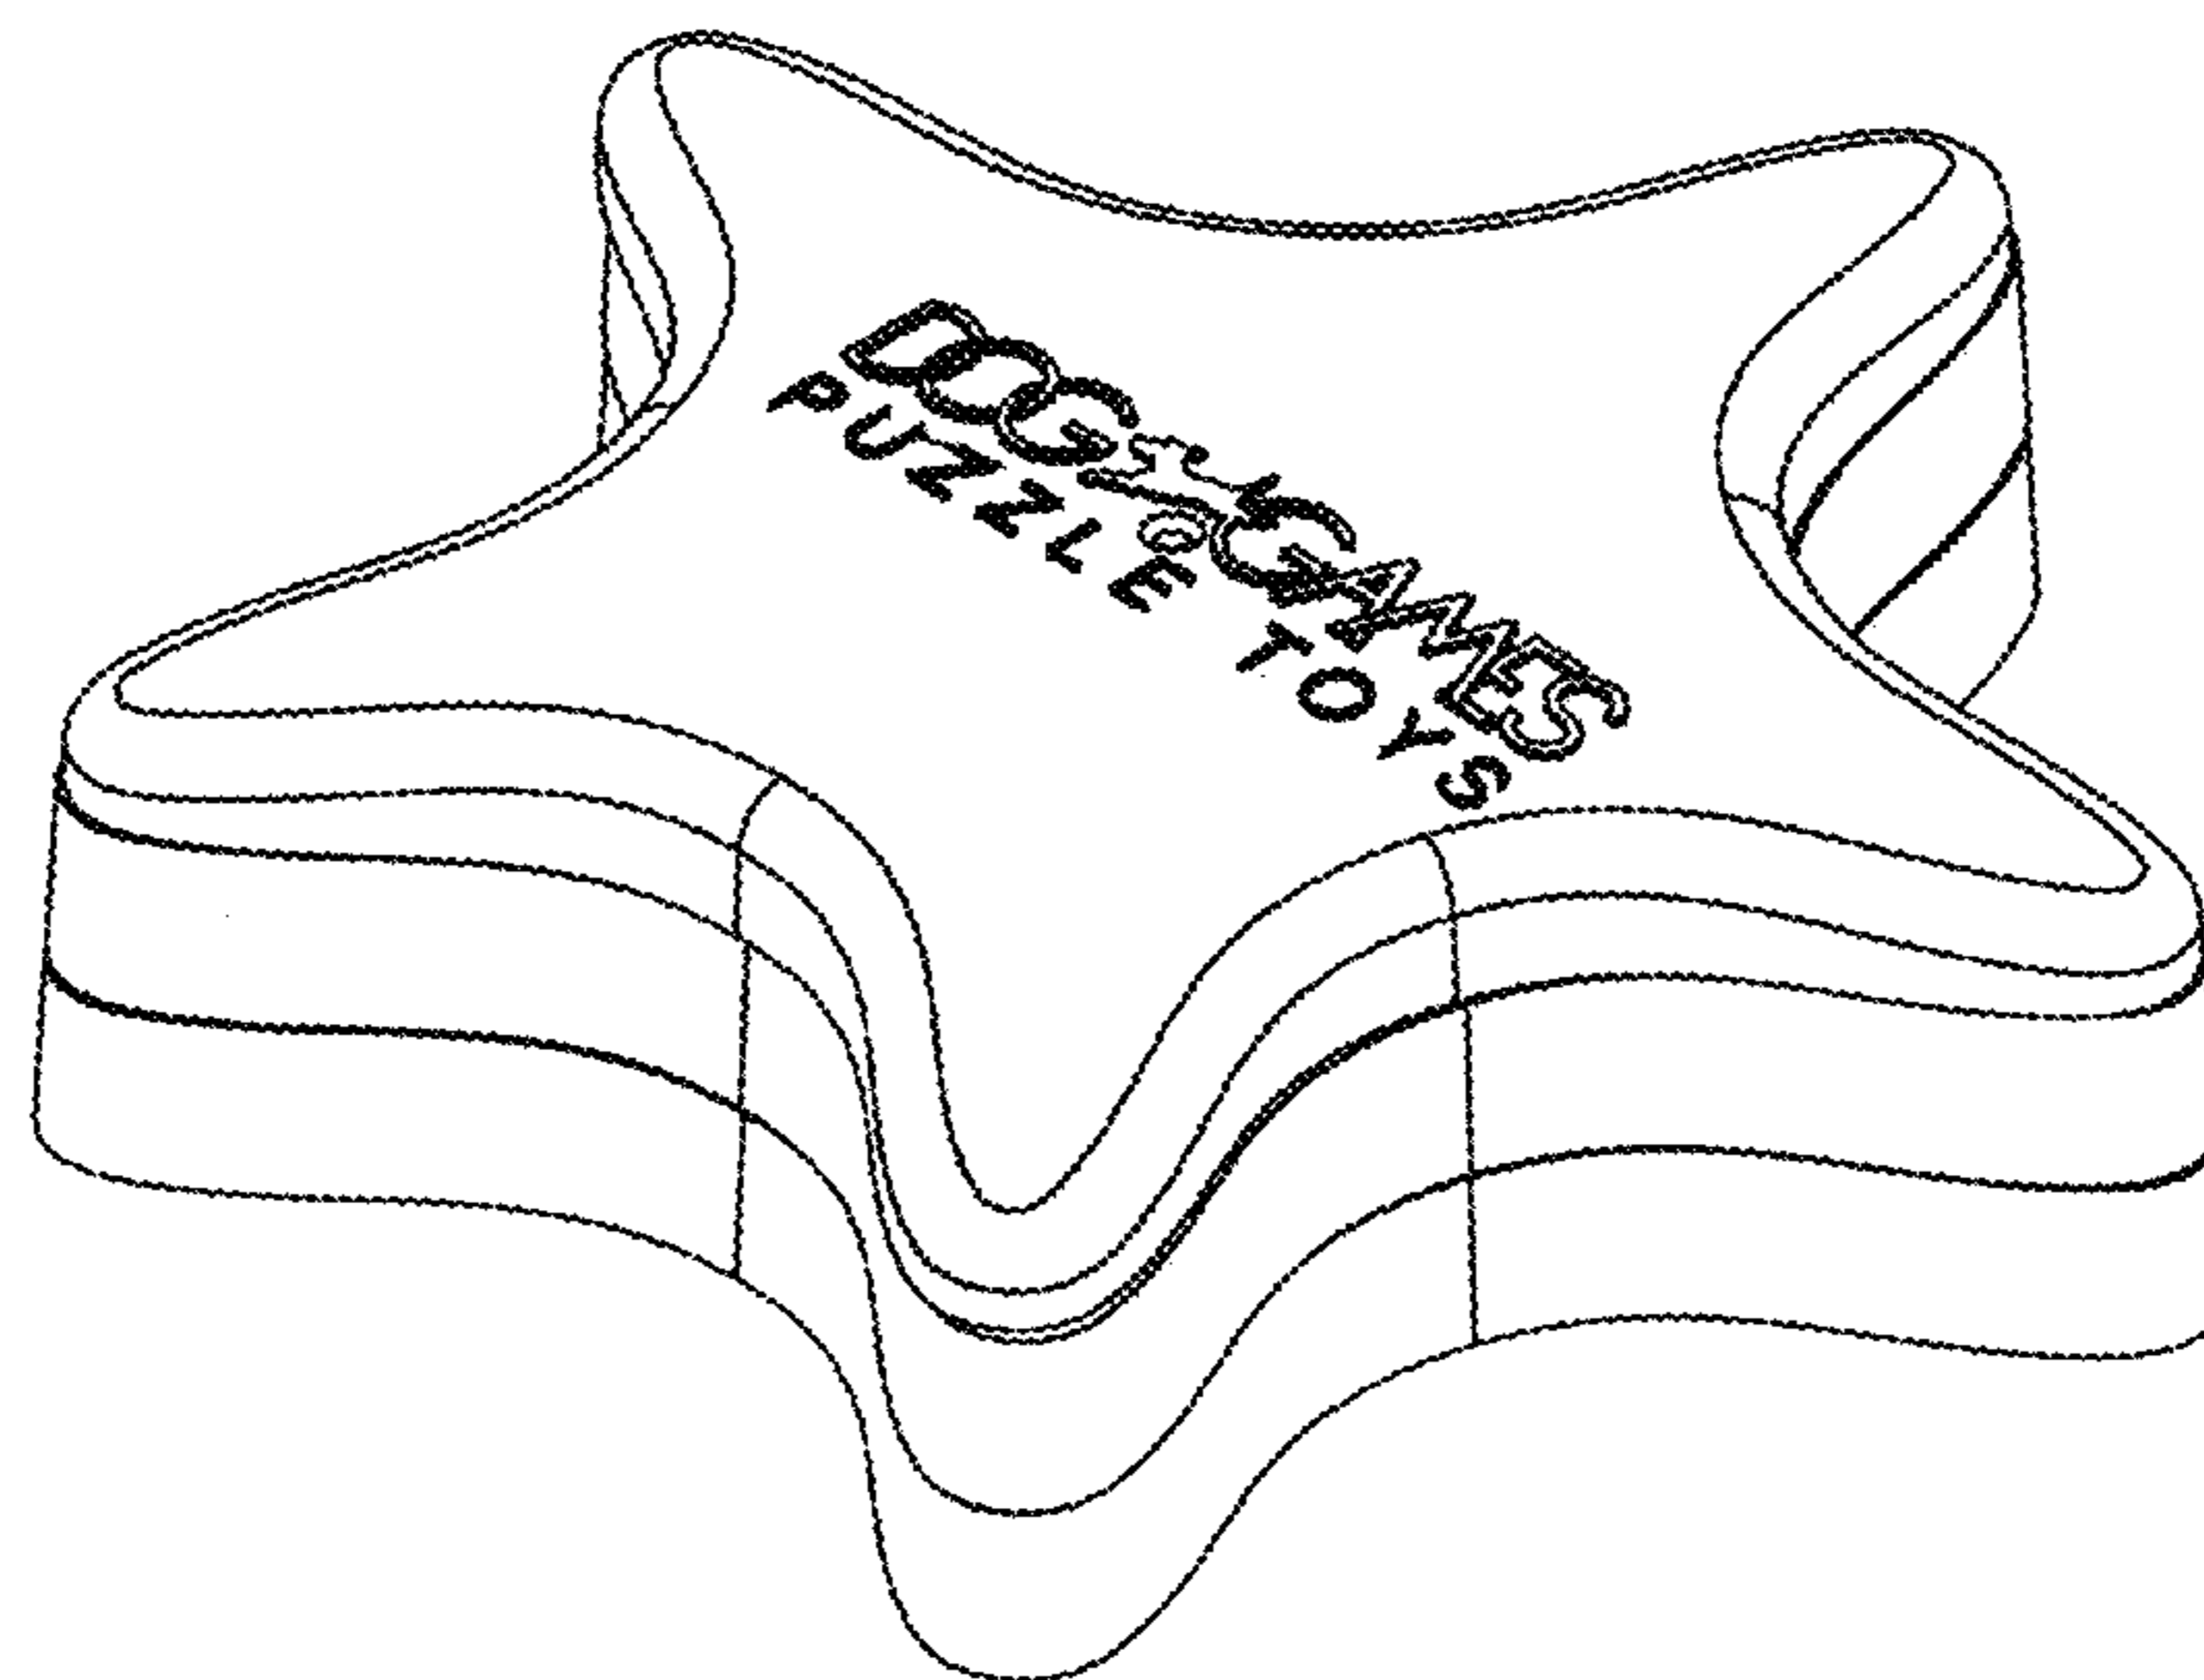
is a top perspective view of the star-shaped pet treat dispensing puzzle shown in its assembled condition.
